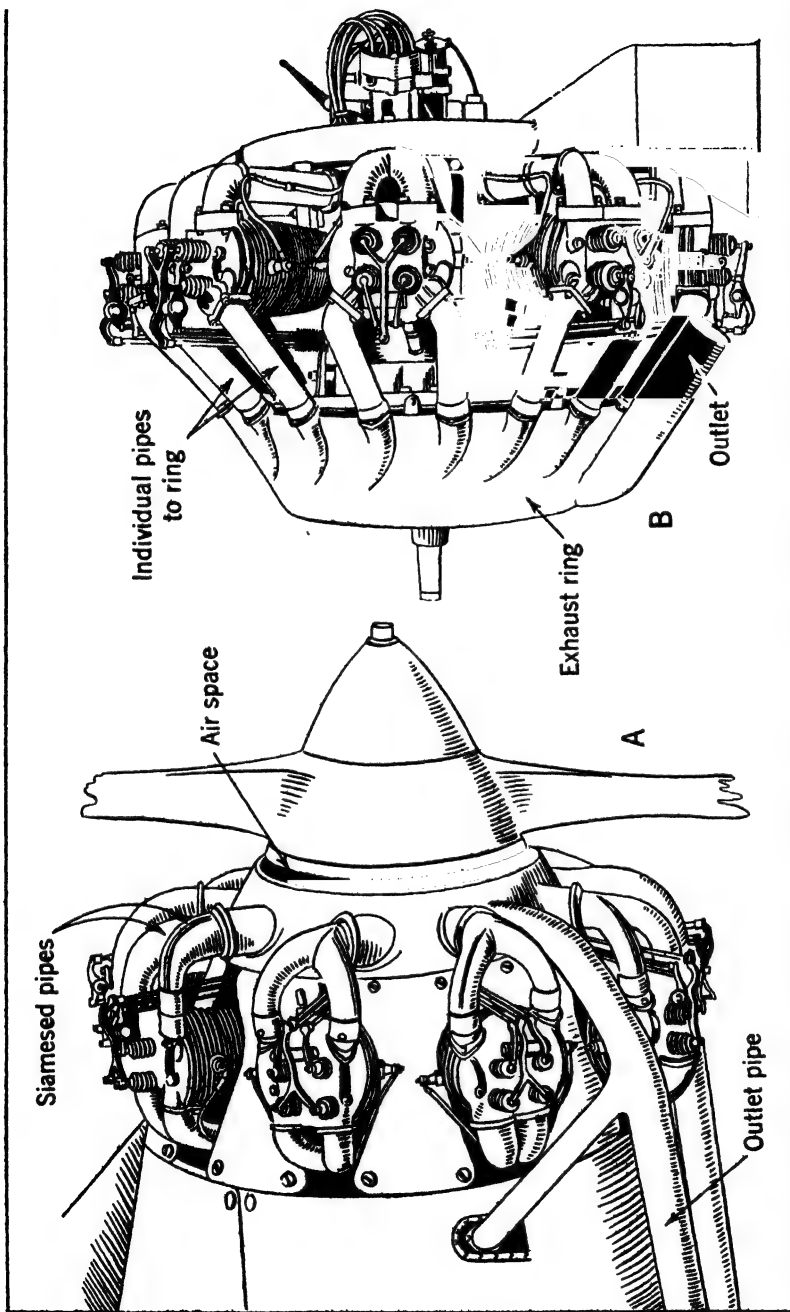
B.—Diagrams Showing Application of Bristol-Jupiter Exhaust System. A—Showing Cowling used when Engine is Installed in Fuselage. B—View of Engine Removed from Fuselage Showing Connections to Exhaust Ring.
